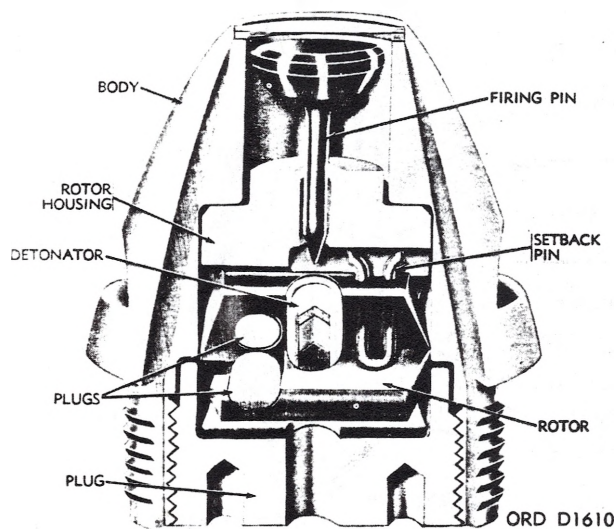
Fuze M74, Cutaway View Showing Unarmed Condition
